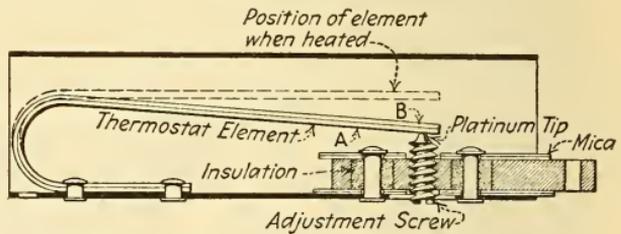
Thermostat of the "Universal" Heating Pad.
